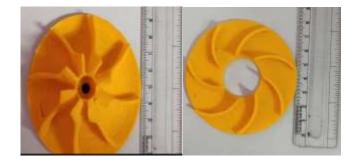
3D Printed Impeller 1 Fig-11:3D Printed Impeller 2
